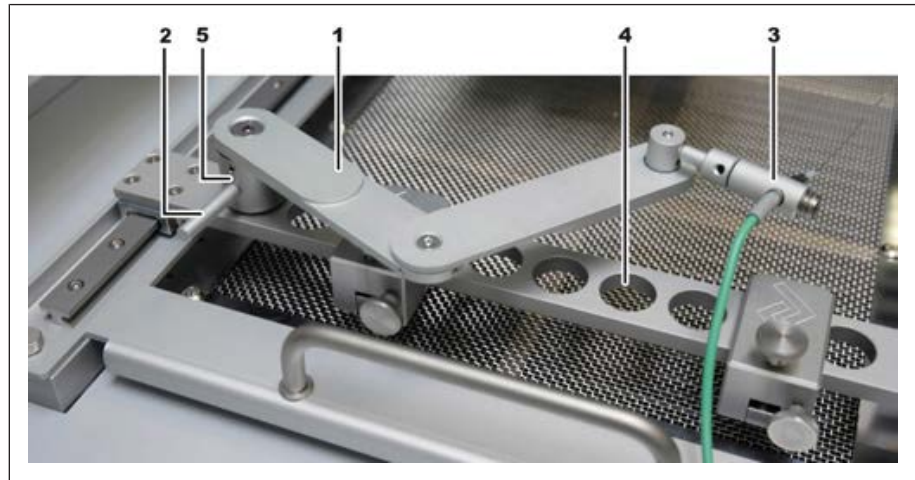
Assembly of the Accu-TC holder and thermocouple, example picture
